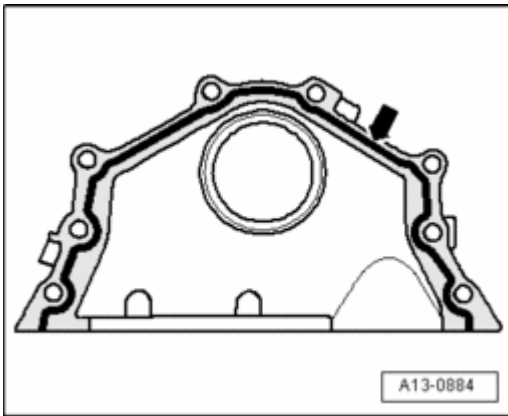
Applying Thin Bead Of Sealant To Clean Sealing Surface Of Sealing Flange
